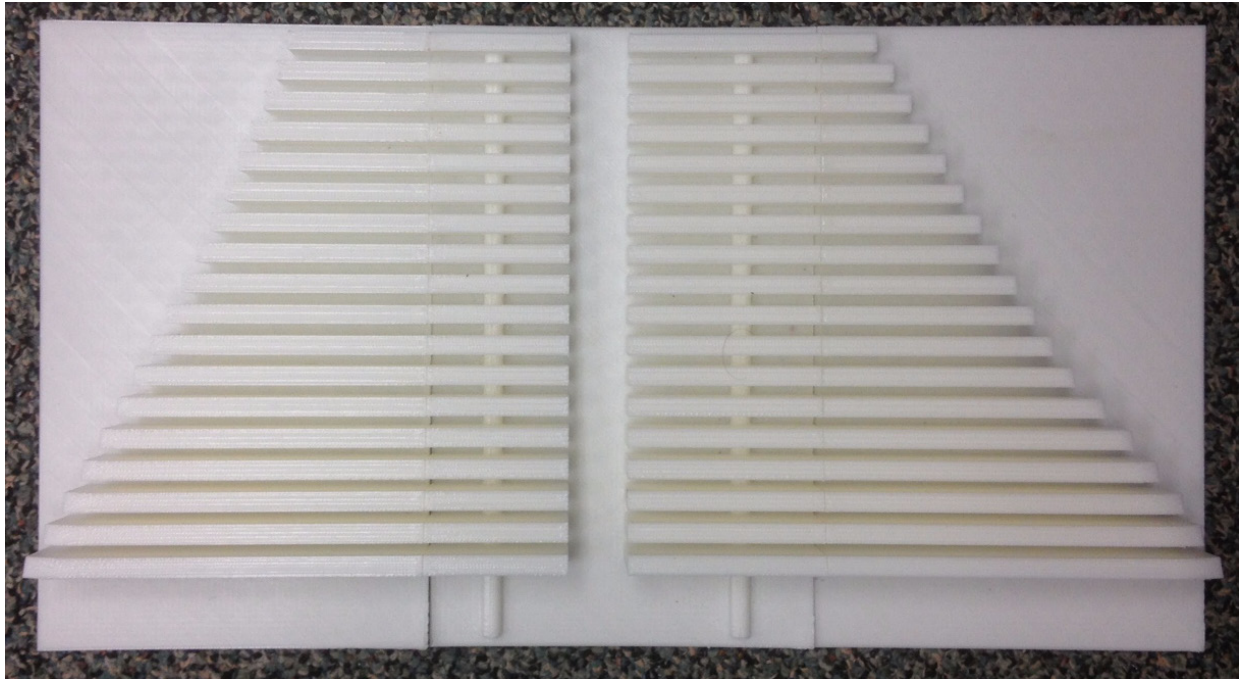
3D PRINTED CHANNEL INSERTS
